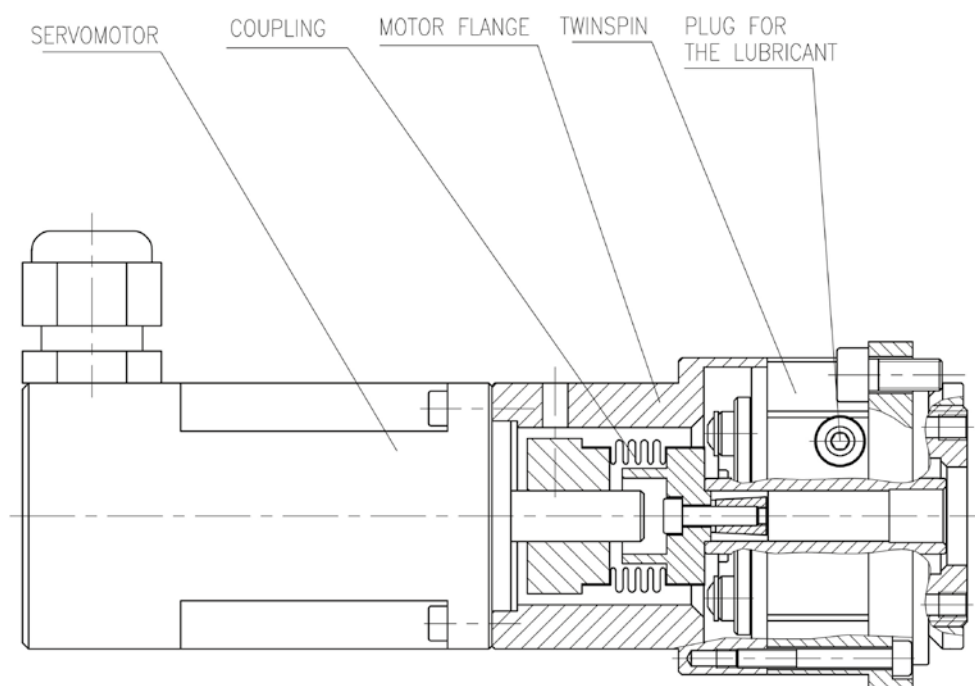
Typical connection of the motor to the TS reduction gear M series
